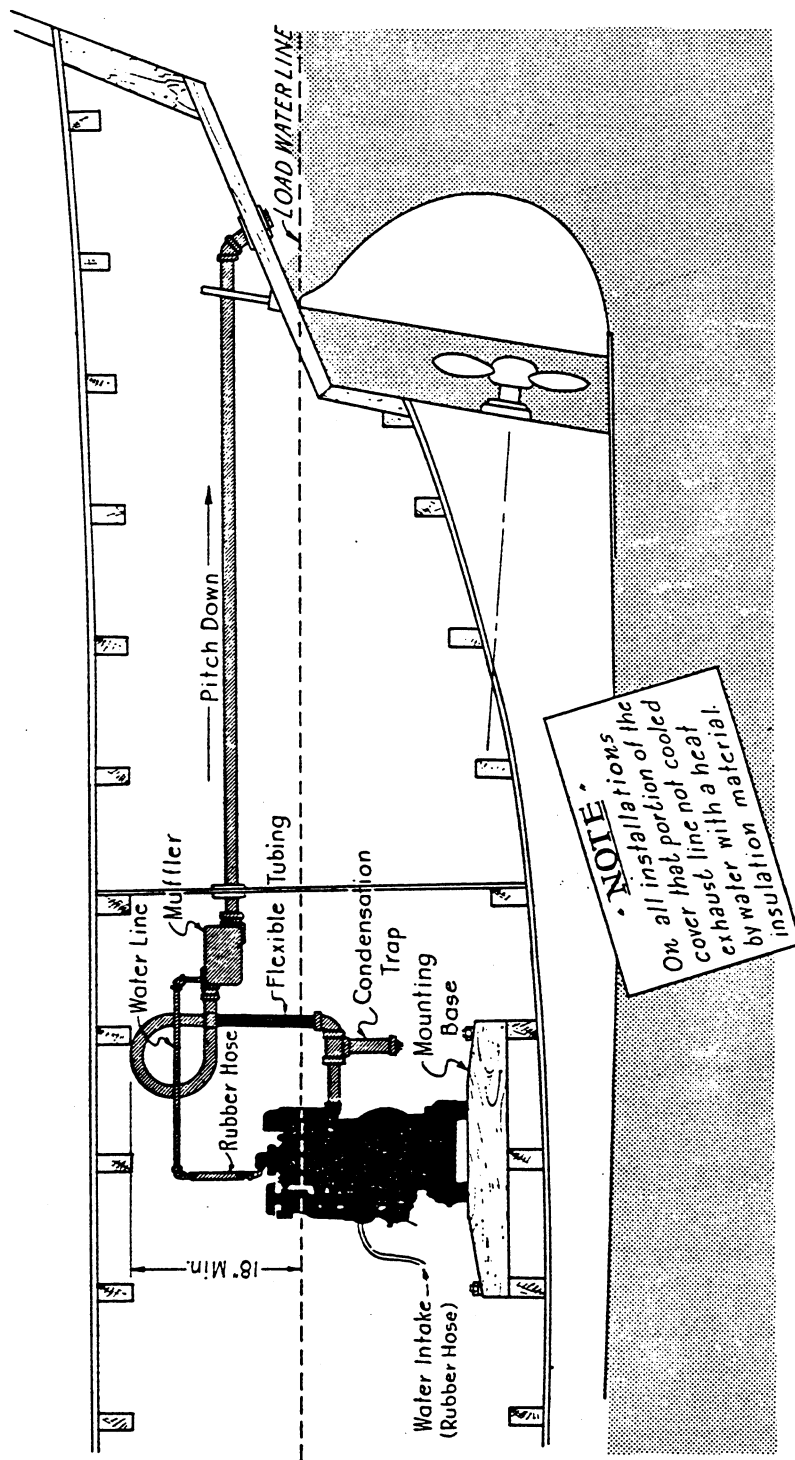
TYPICAL INSTALLATION: BELOW LOAD LINE
